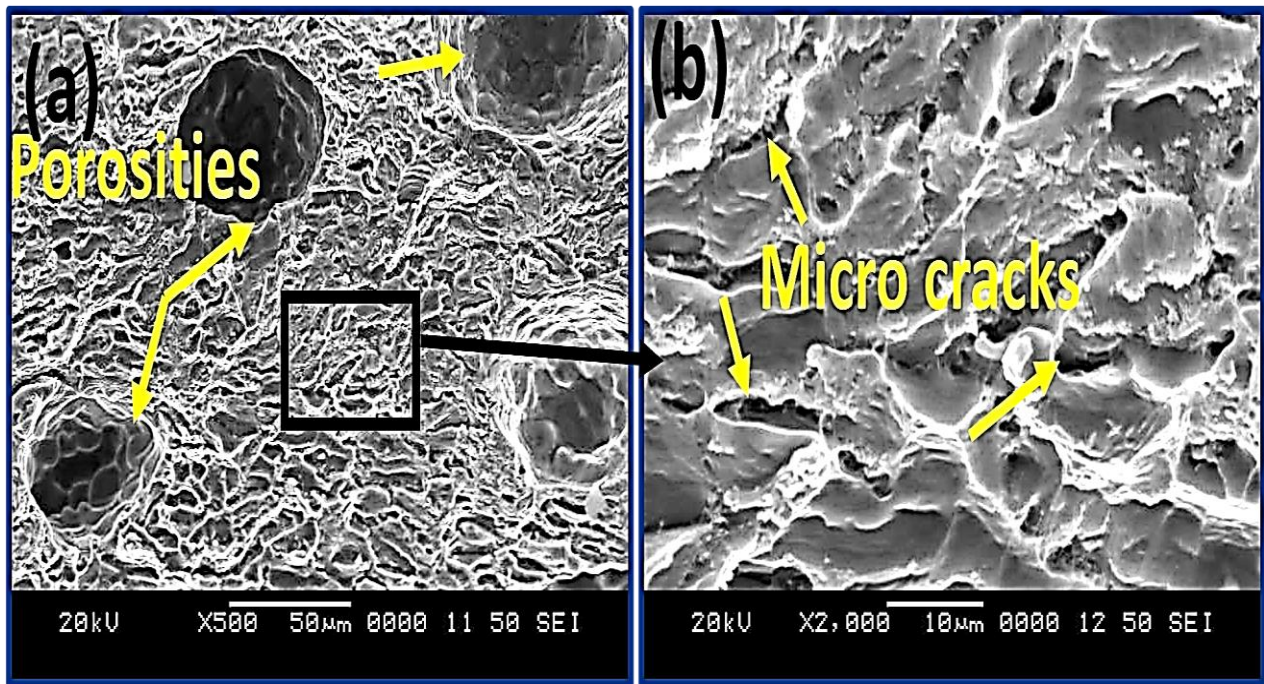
SEM images of fracture surfaces of the A6061- T6 weld interface in CMT welded A6061-T6 and A6082-T6 joint using ER4043 filler wire (a) porosities and (b) higher magnification images shows micro-cracks along interdendritic regions
